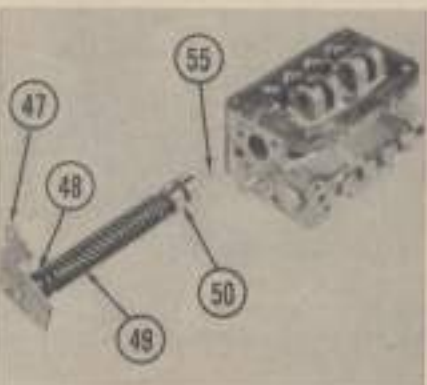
Unloading valve assembly removed. Tension of spring (49) is controlled by shims (48).
